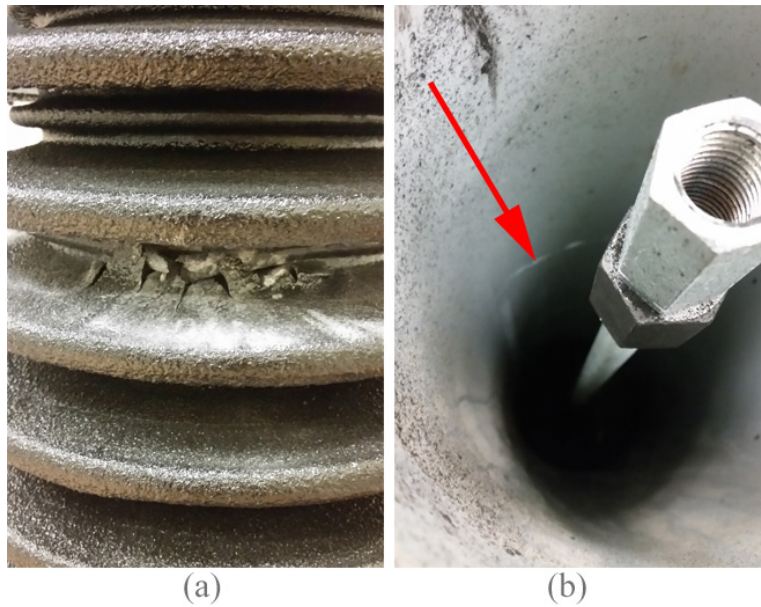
Damage of rod-mounted and coated bushing (a) on outside of petticoat and (b) inside the bushing.
